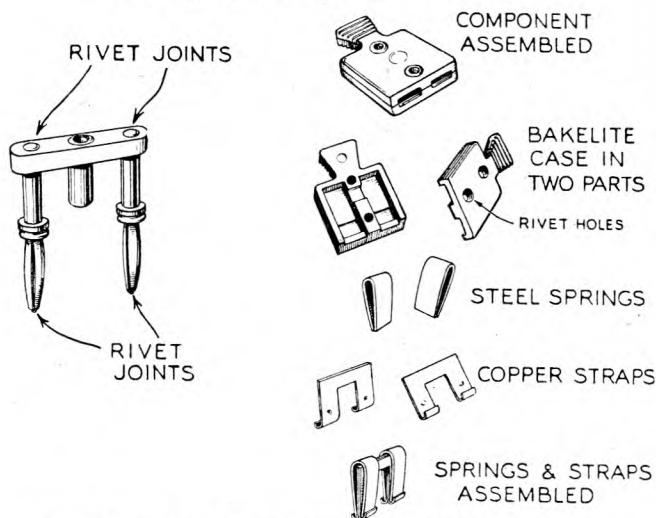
EXAMPLES OF UNNECESSARY JOINTS IN U-LINKS.
